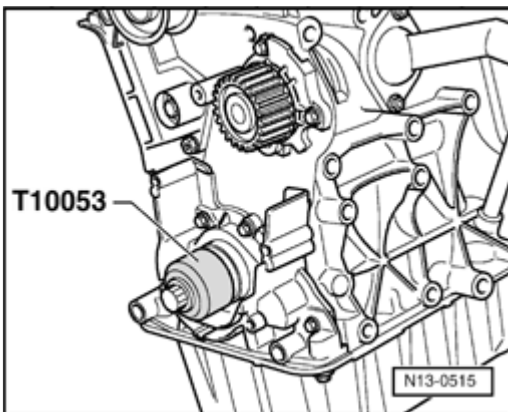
Identifying Press Sleeve T10053 & Bolt Mounted
